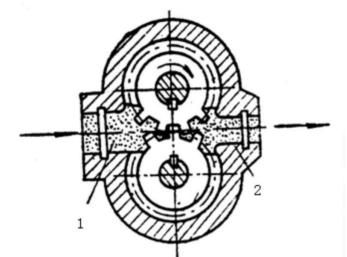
Working Principle of Gear Pump (1) Oil suction cavity (2) Oil pressing cavity
